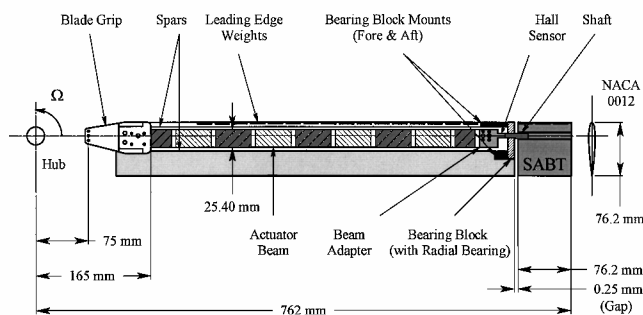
Schematic of Mach-scale rotor blade with integrated actuator beam and active blade tip.
